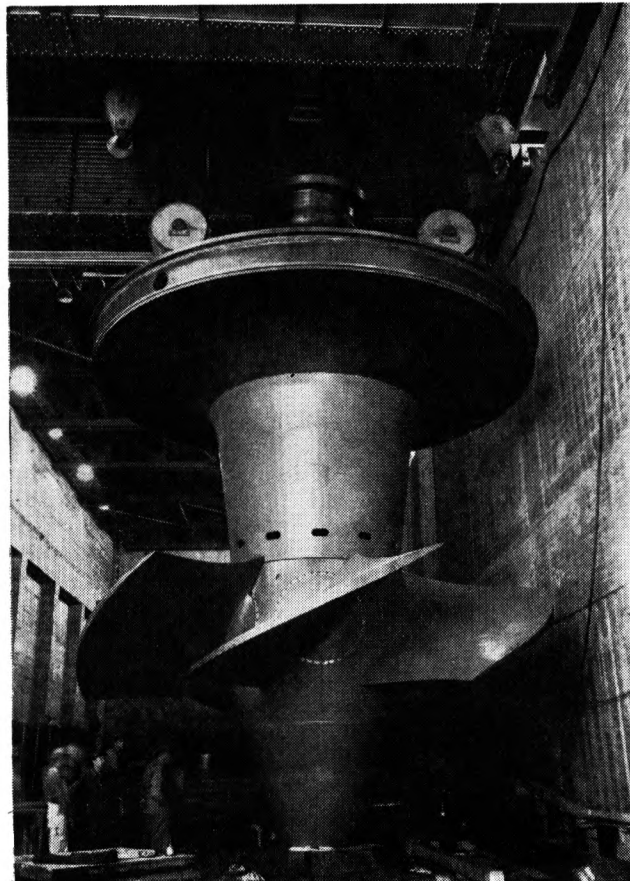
HEAD COVER AND RUNNER ASSEMBLY; PICKWICK LANDING
